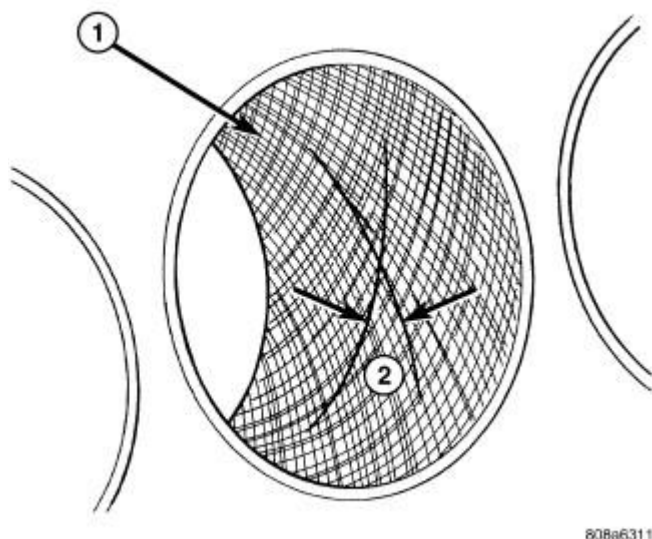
Cylinder Bore Cross-Hatch Pattern
